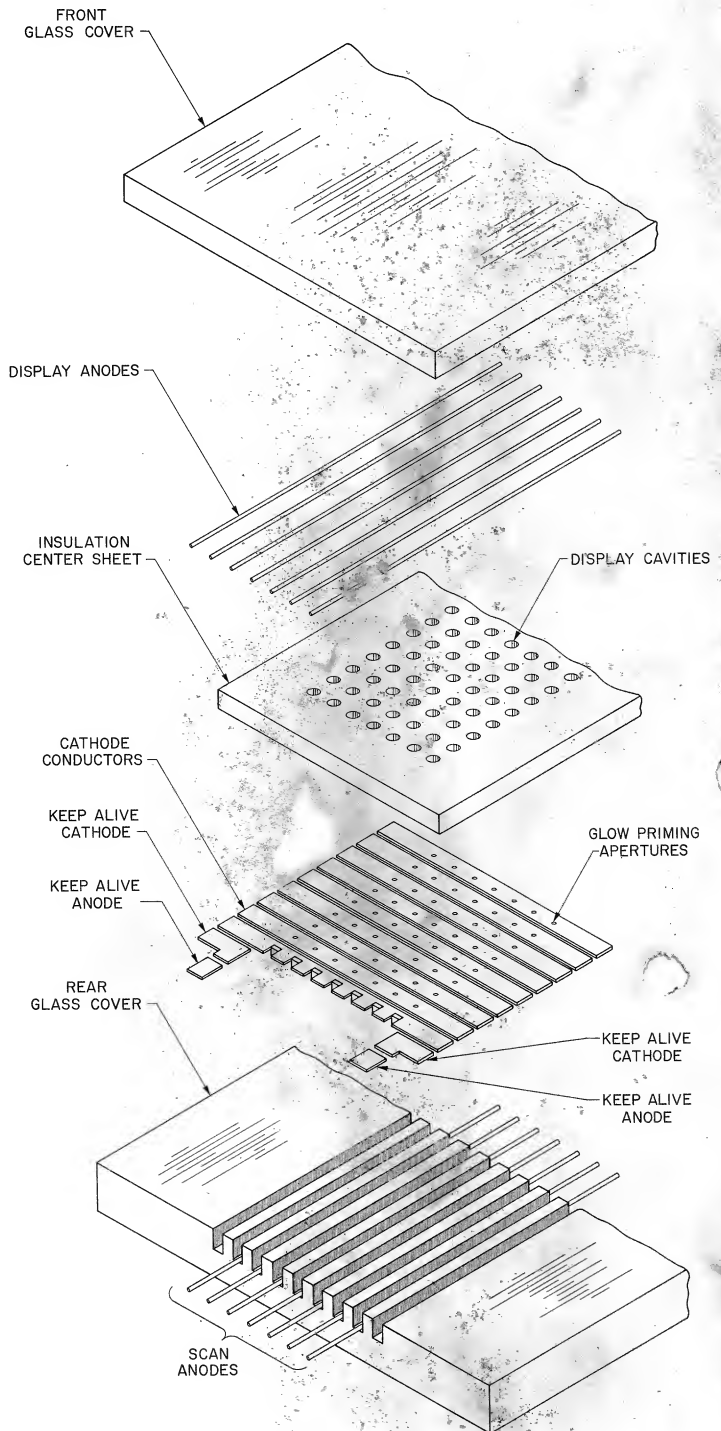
SELF-SCAN PANEL DISPLAY EXPLODED VIEW
